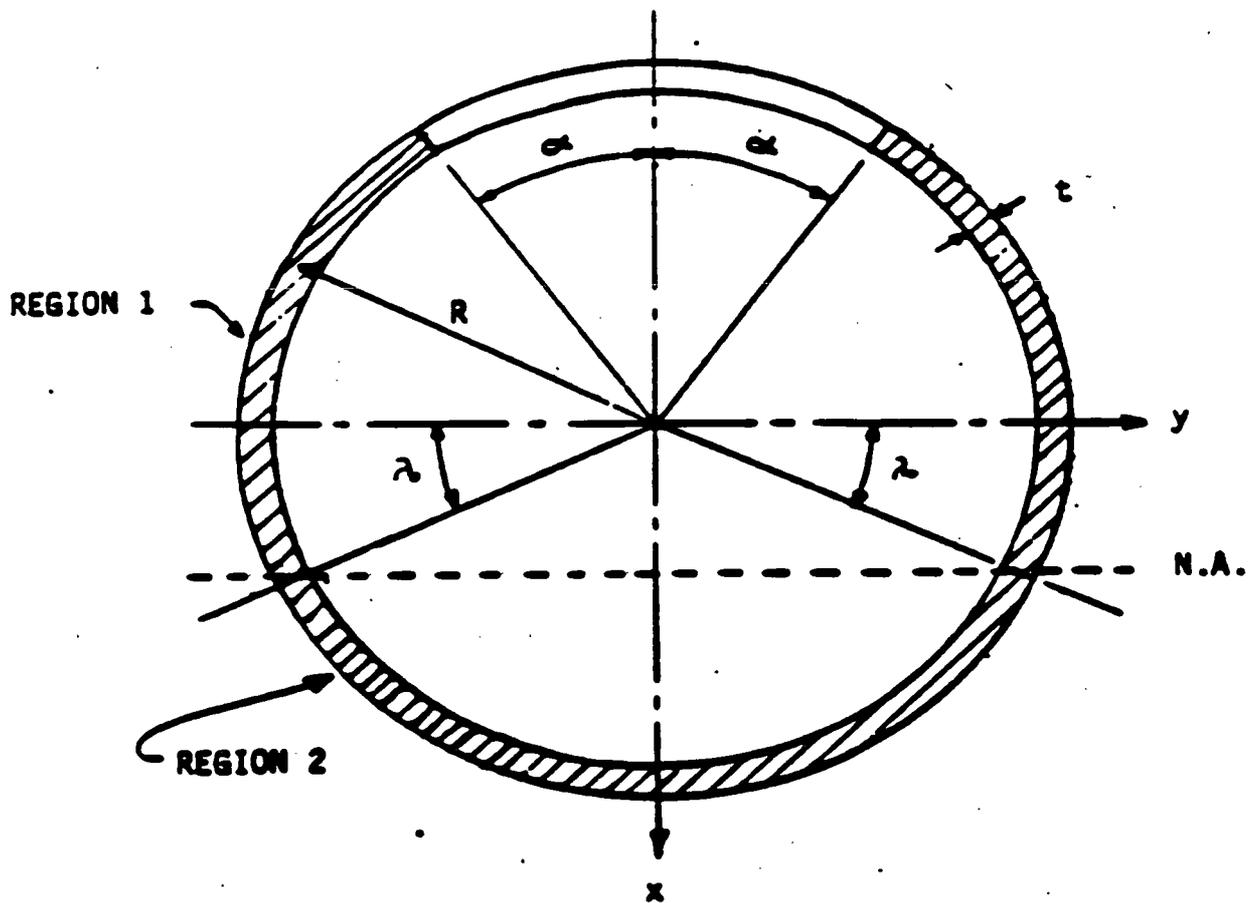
Cross Section Of Pipe With A Through-Wall Circumferential Crack of Length 2α .
